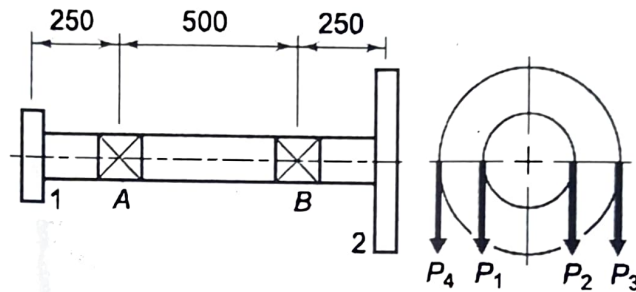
Shaft carrying two pulleys (All dimensions are in mm)
